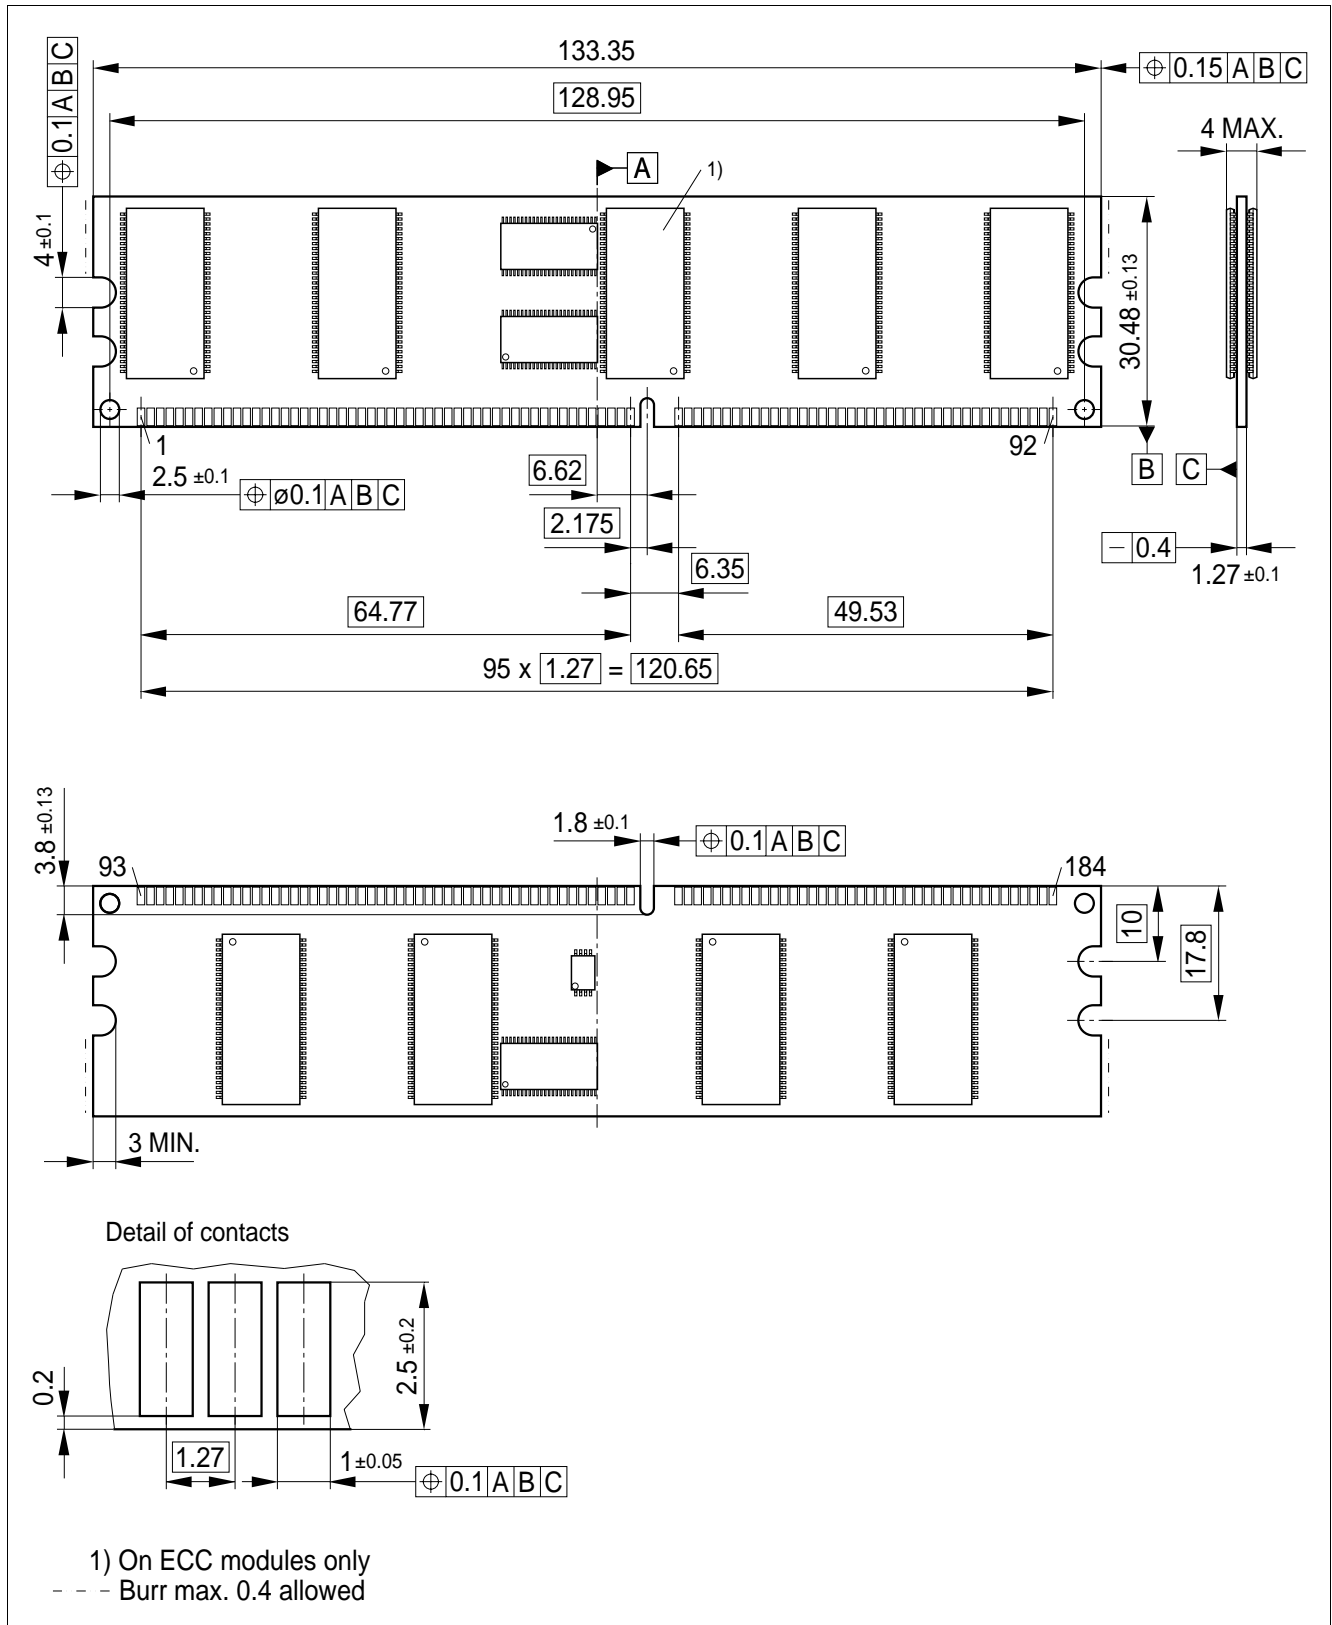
Package Outlines Raw Card L (L-DIM-184-13)
